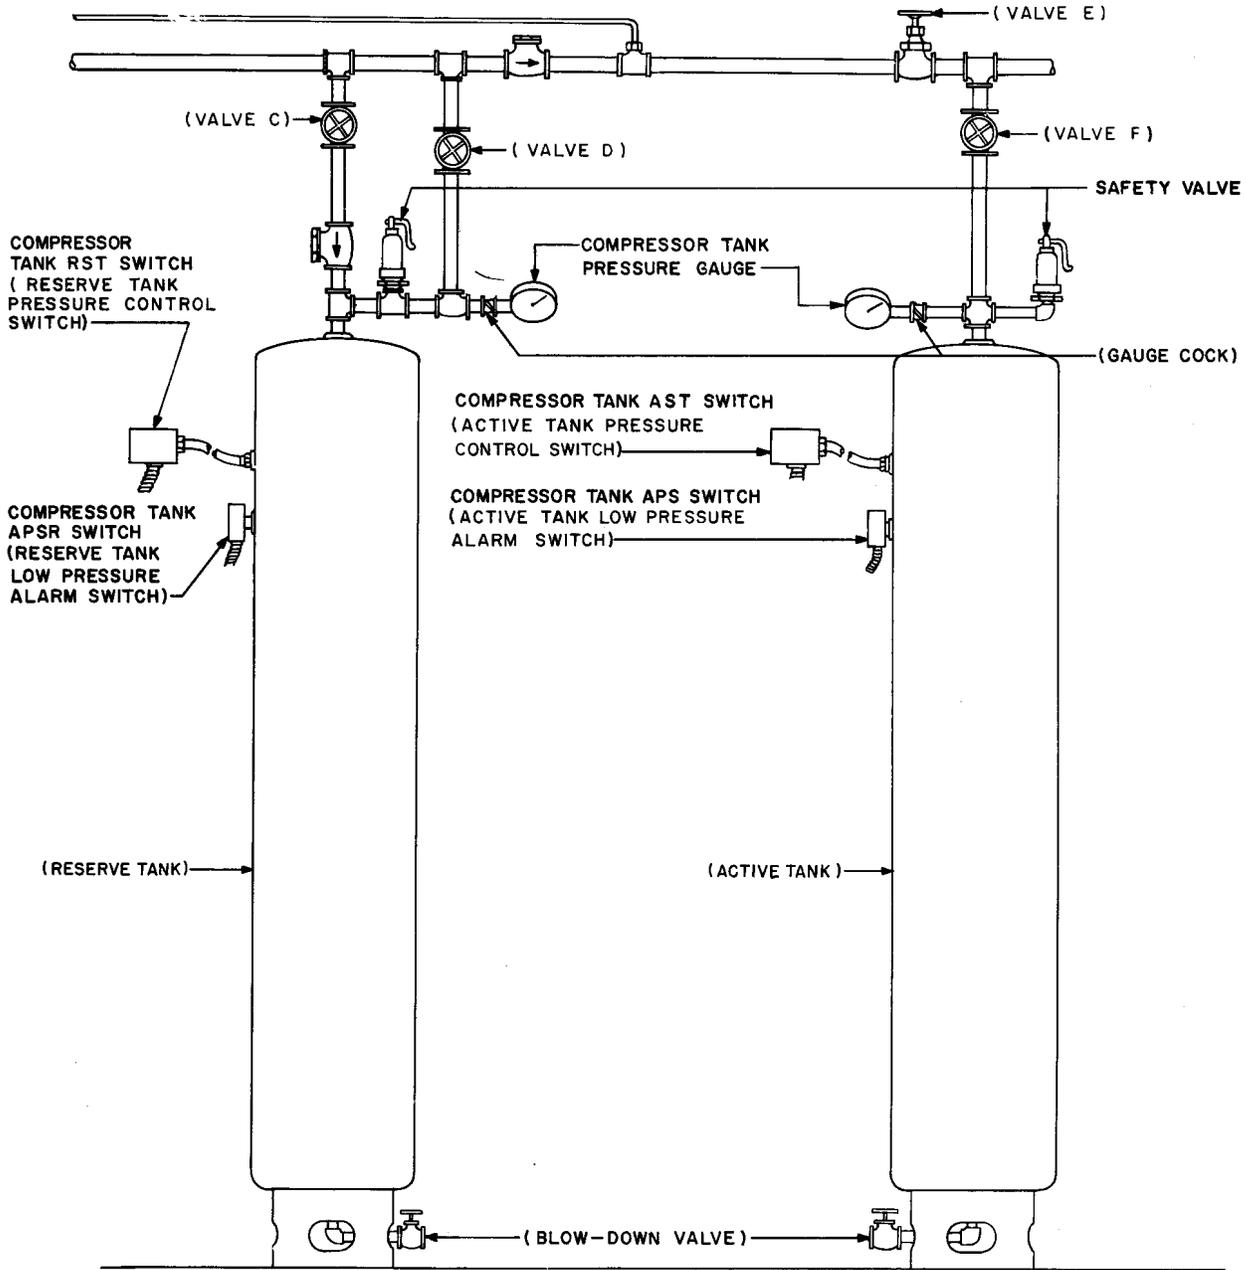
Typical Air-Starting Equipment - Active and Reserve Air Tanks and Associated Equipment (KS-15777, L51 Air-Starting Equipment Shown)
